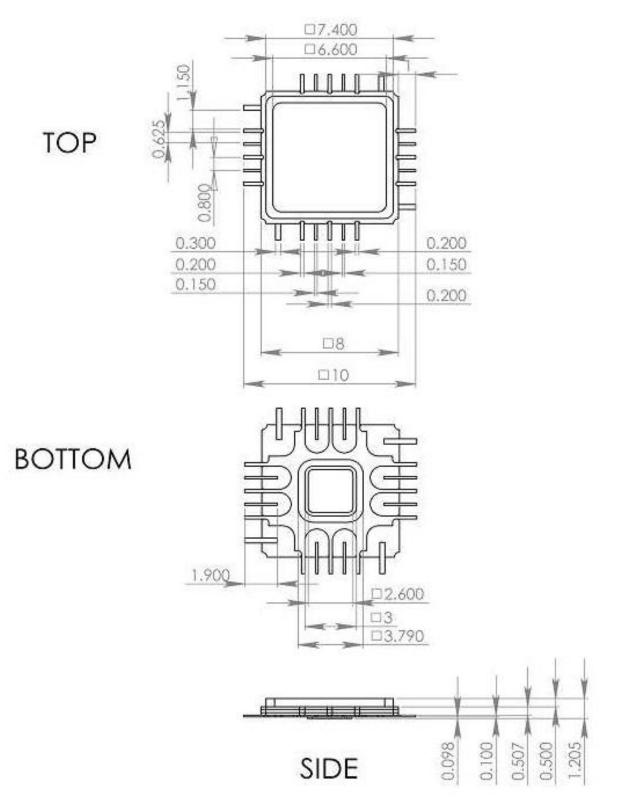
CQFP 24-Pin Package Drawing (All Dimensions in mm)
